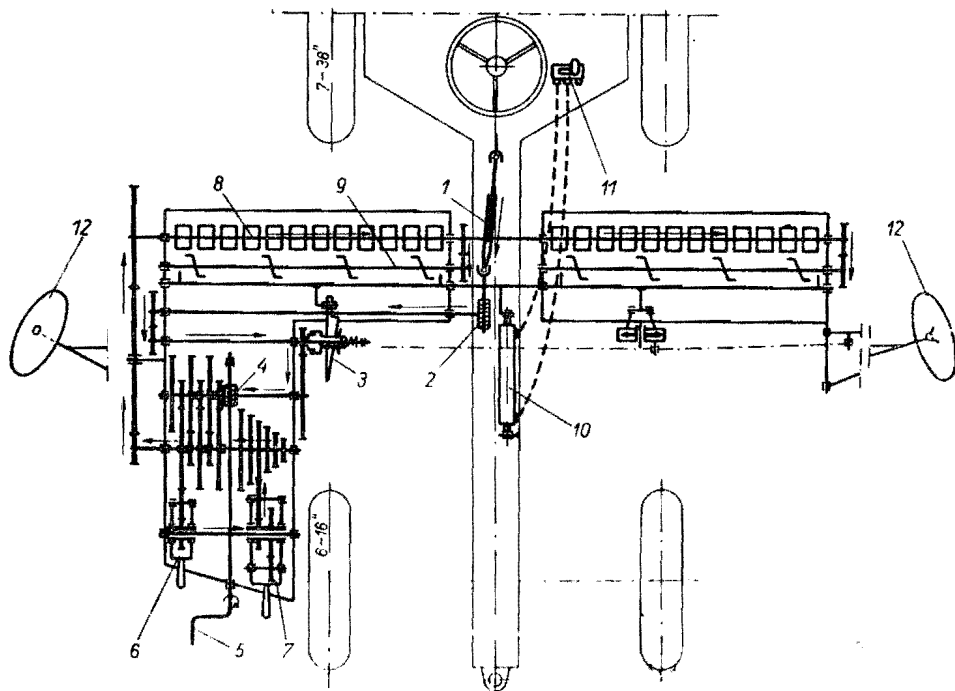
Example of power drives in a drill mounted on a tool carrier with studded feeding units: 1 — PTO shaft; 2 — worm gear; 3 — key for engagement and disengagement of coupling; 4 — worm gear; 5 — hand crank for wheels rotated by means of a worm gear; 6 — sliding lever with two-wheel gear set; 7 — sliding lever with two-gear sets; 8 — shaft with mounted studded rolls; 9 — agitator; 10 — hydraulic cylinder of the opener lifter; 11 — oil pump; 12 — disk markers.
